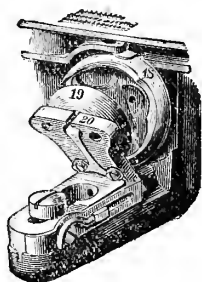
NEW NO. 10 MACHINE, THE BOBBIN HOLDER.
